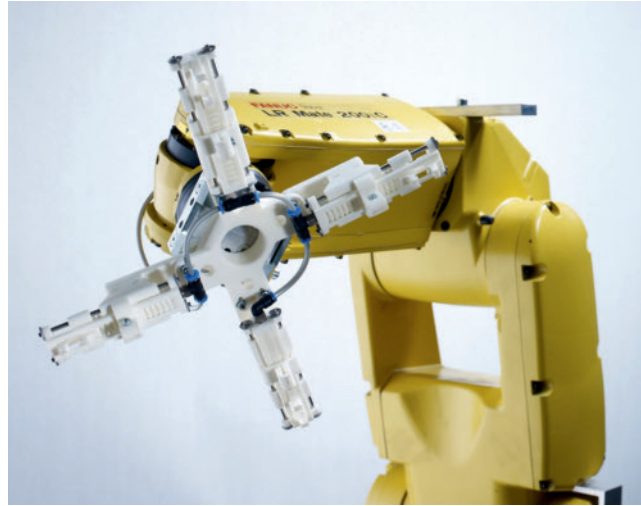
By using the PA forming technique, grippers and robot hands can be manufactured using custom design data (photo: ASS)
